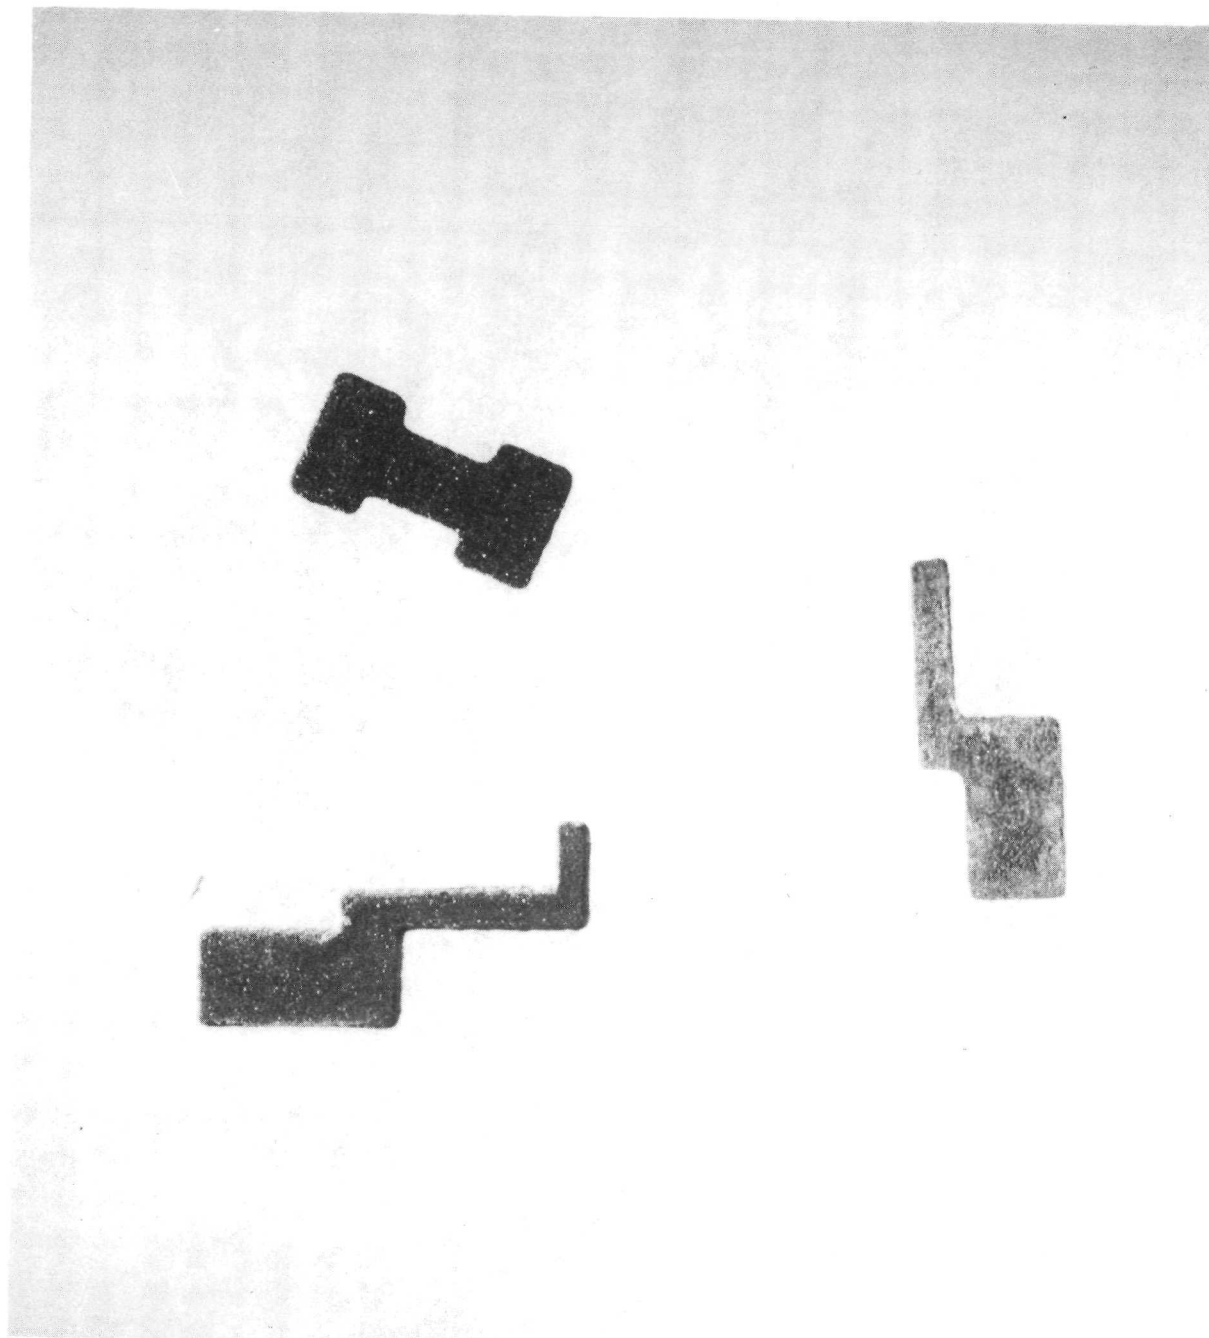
Individual Ferrite Pieces for Single Probe Design
